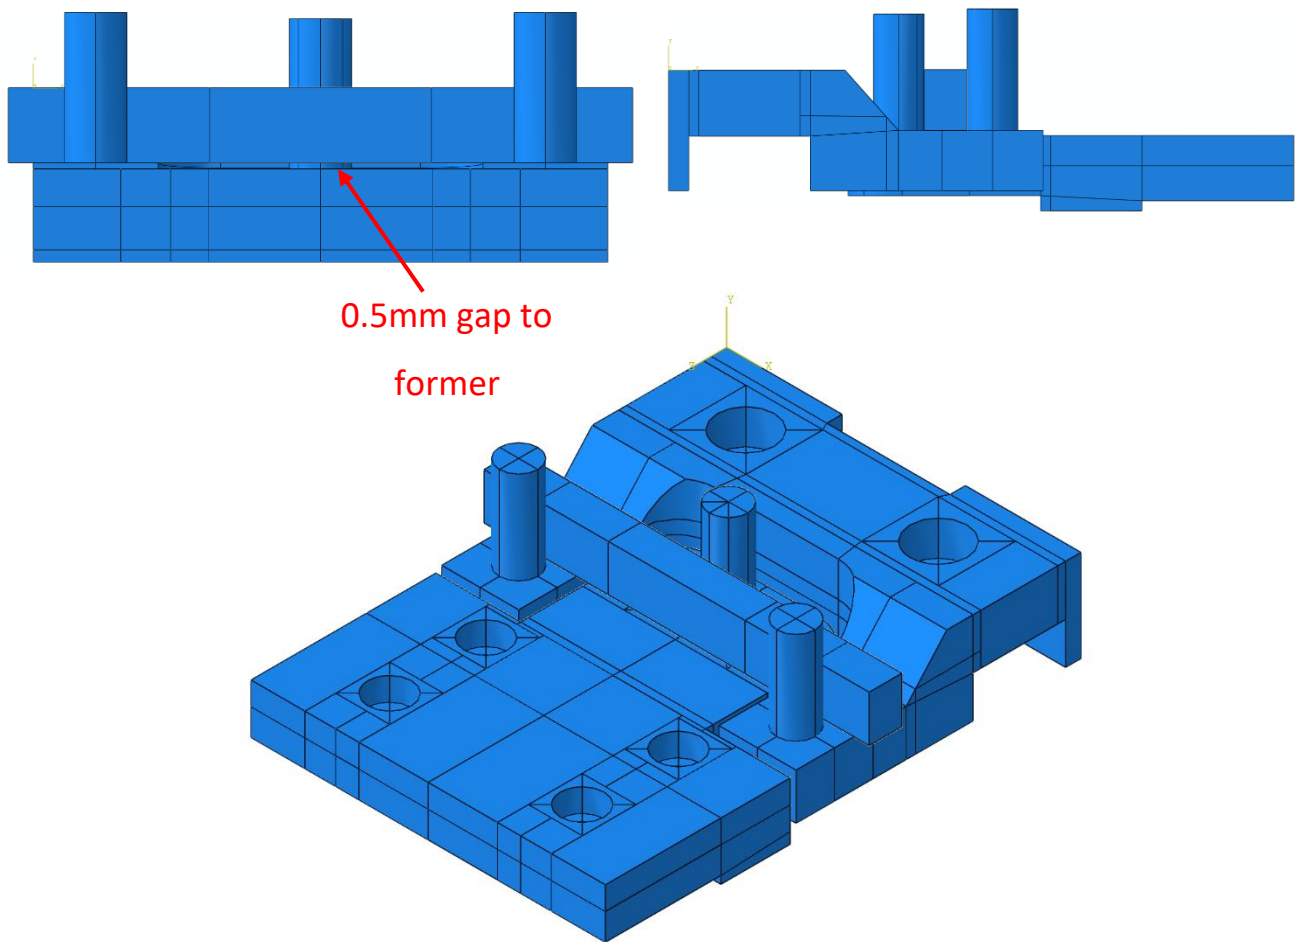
The Deben tooling and 4.25mm thick bend test specimen assembled after sectioning in Abaqus, top left front view, top right, side view and bottom, Isometric view.
